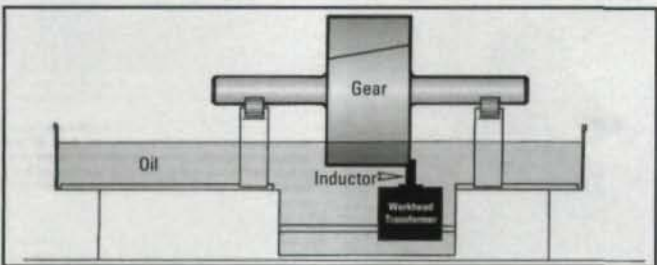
Schematic diagram of the gear handling machine for tooth-by-tooth submerged induction hardening.
